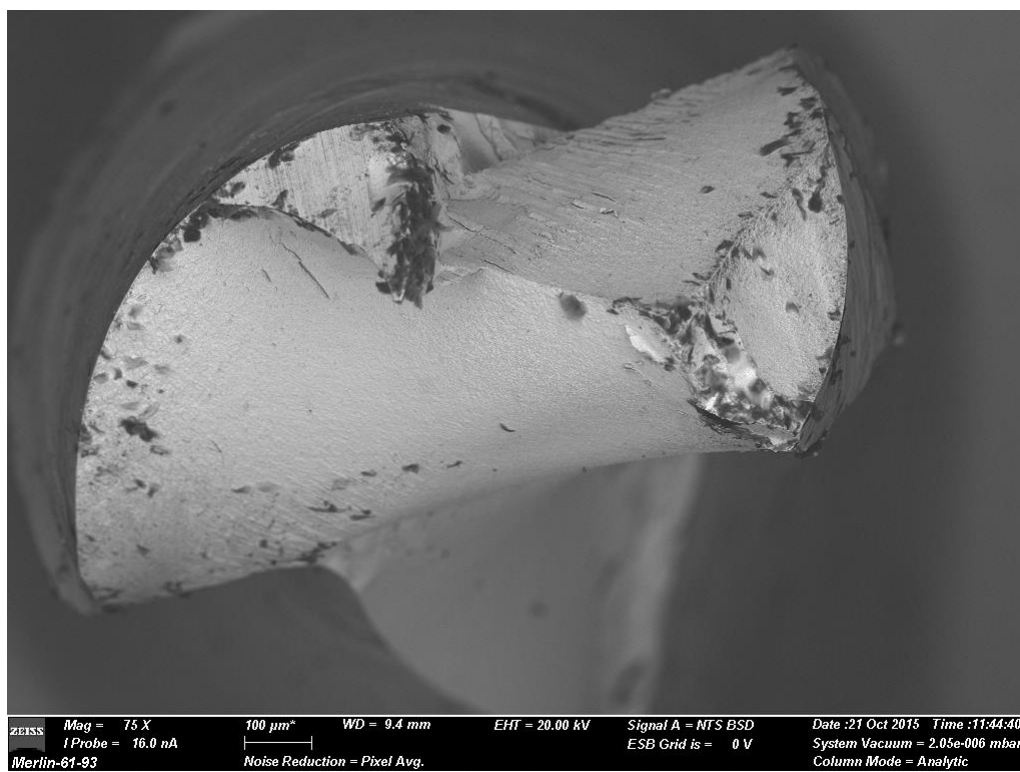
Experimental run 17: Tungsten carbide tool after machining with parameters $v_c = 75.4$ [m/min], $v_f = 768$ [mm/min] and $a_p = 125$ [μm]
